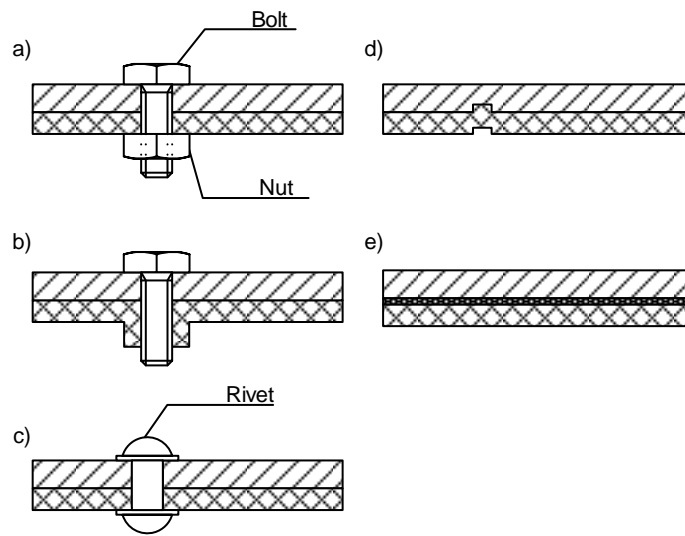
Assembly of two sheet-metal parts using different assembly processes
